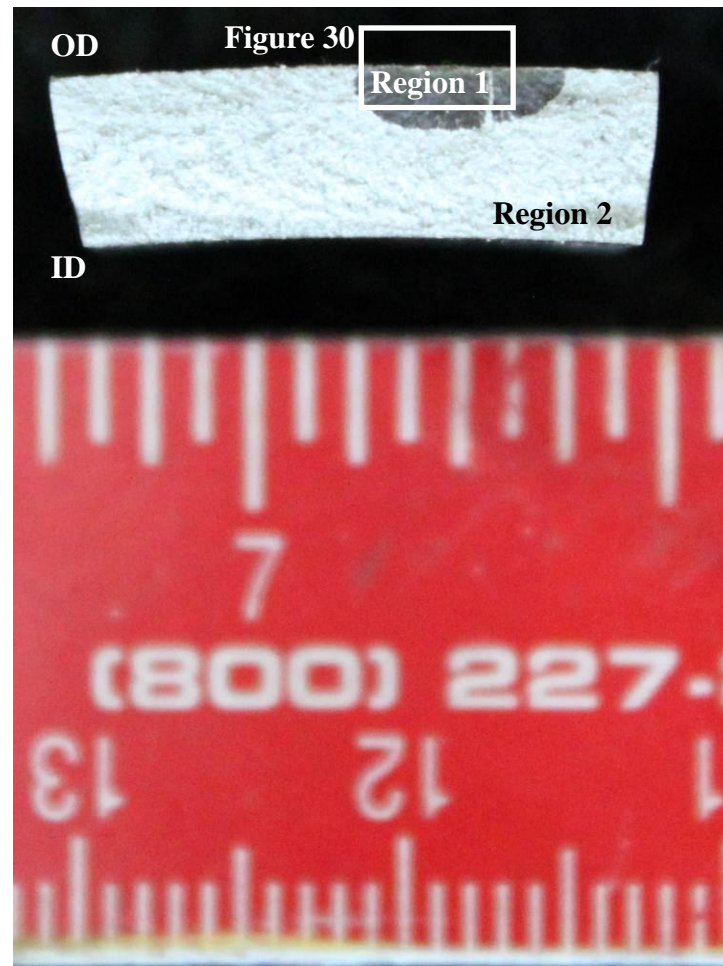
Photograph of the fracture surface from Crack Colony 2.
